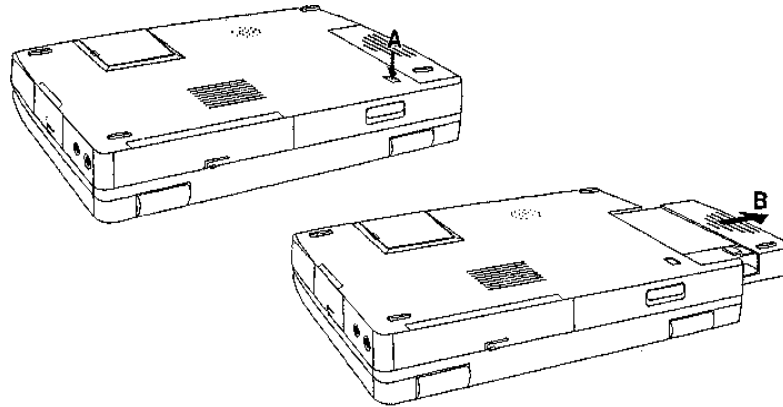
Floppy Disk Drive Disassembly/Reassembly
